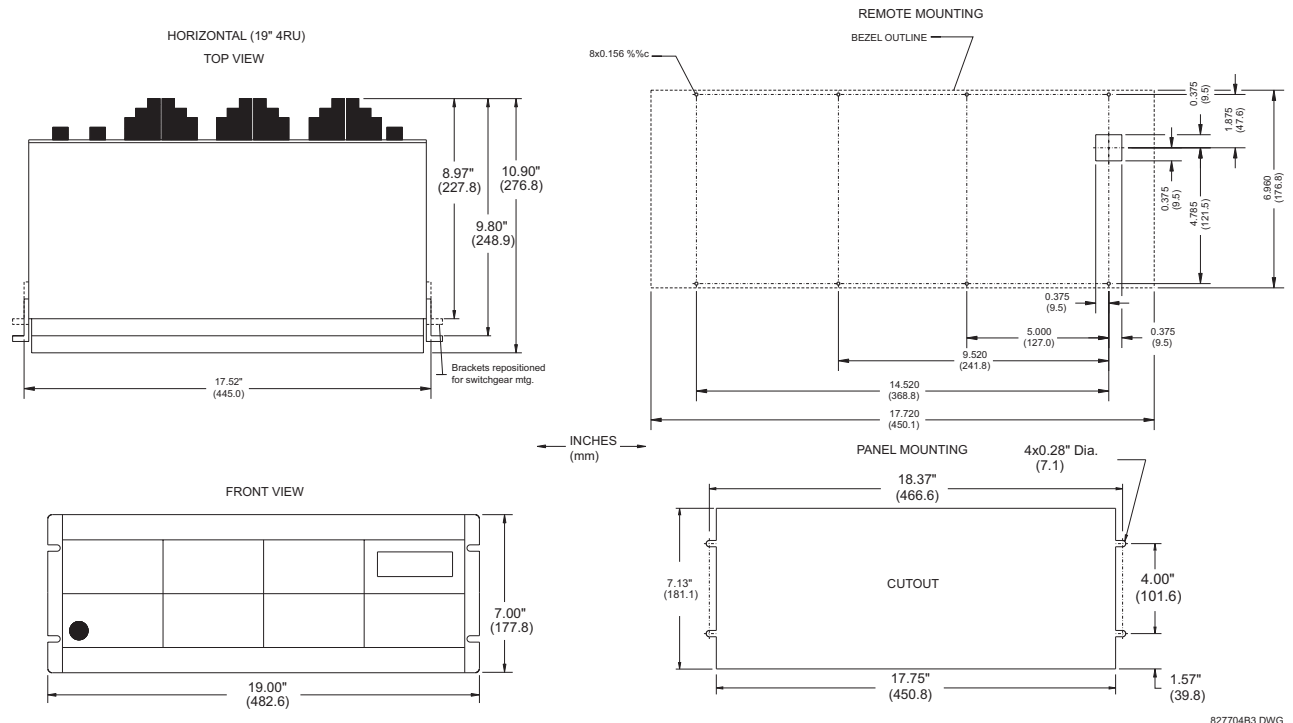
F60 HORIZONTAL MOUNTING AND DIMENSIONS
